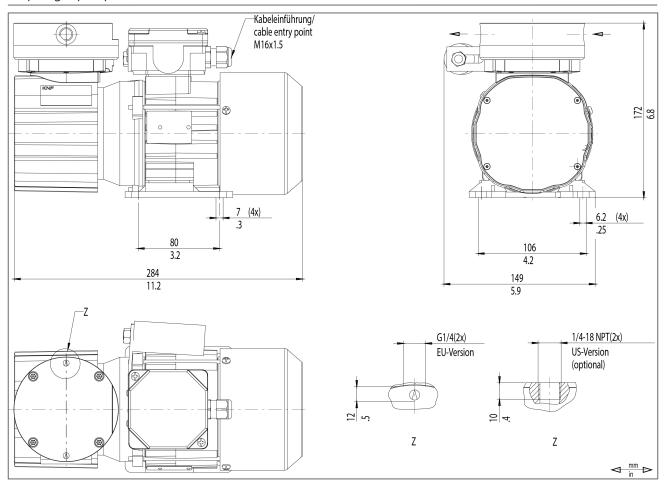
Mounting dimensions N922S_E (capacitor motor)
